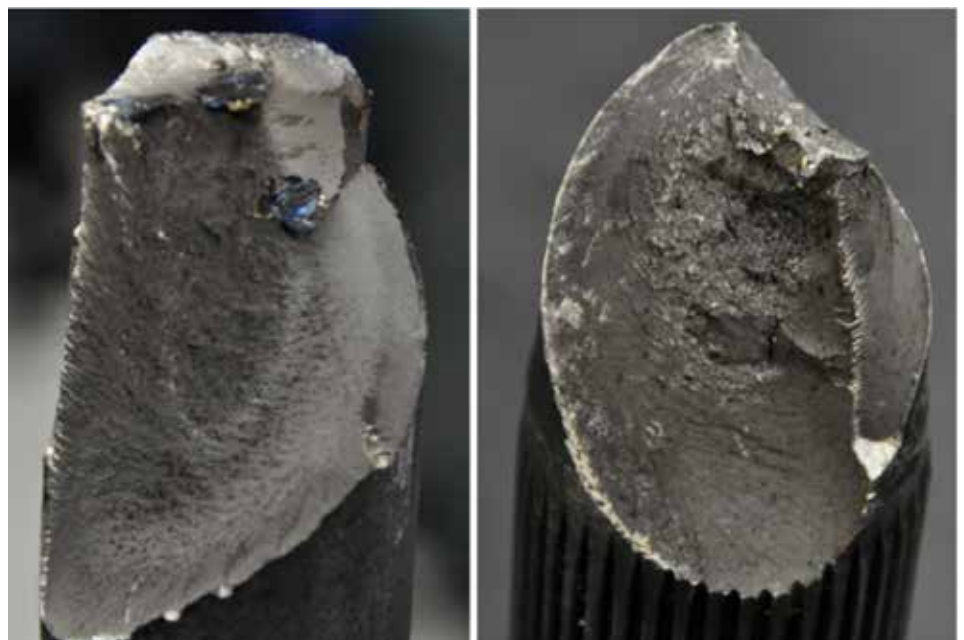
Fracture surface of the axle shaft. (a) Fatigue crack, and (b) Overload crack.
